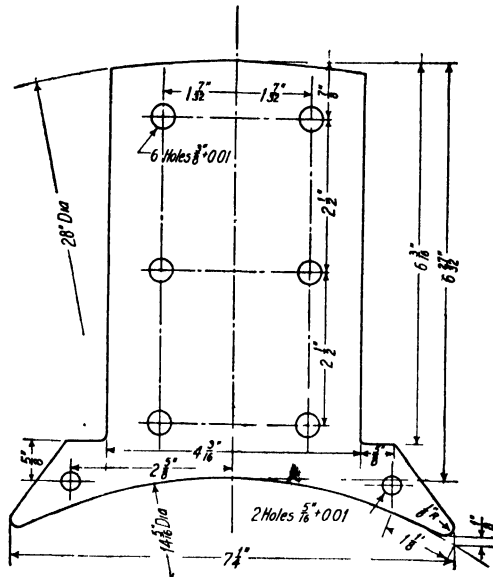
Detail drawing of pole punching, 50-kw., 1200-r.p.m. generator.
